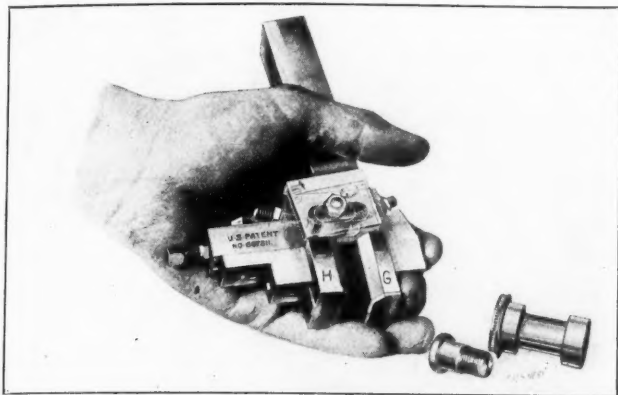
Patented Shaving Tool used on the “Acme” Multiple-spindle Automatic Screw Machine, and Some of the Work on which it was used
